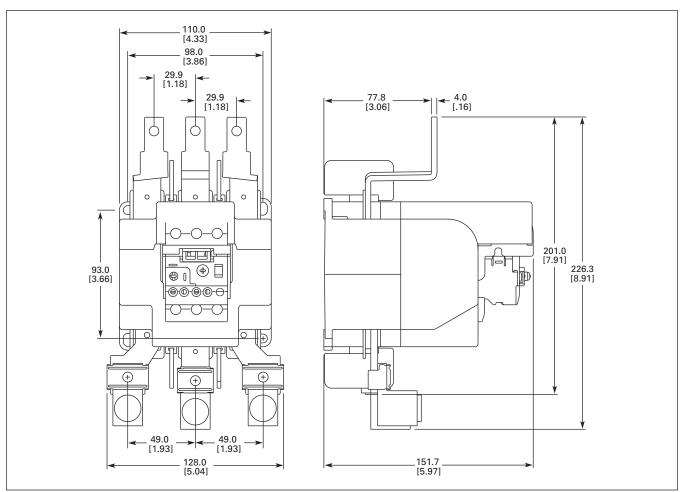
110 mm C396 (30 - 150A) + C396CBARXT Direct Connect to XT Frame G Contactor — Approximate Dimensions in mm [in]
